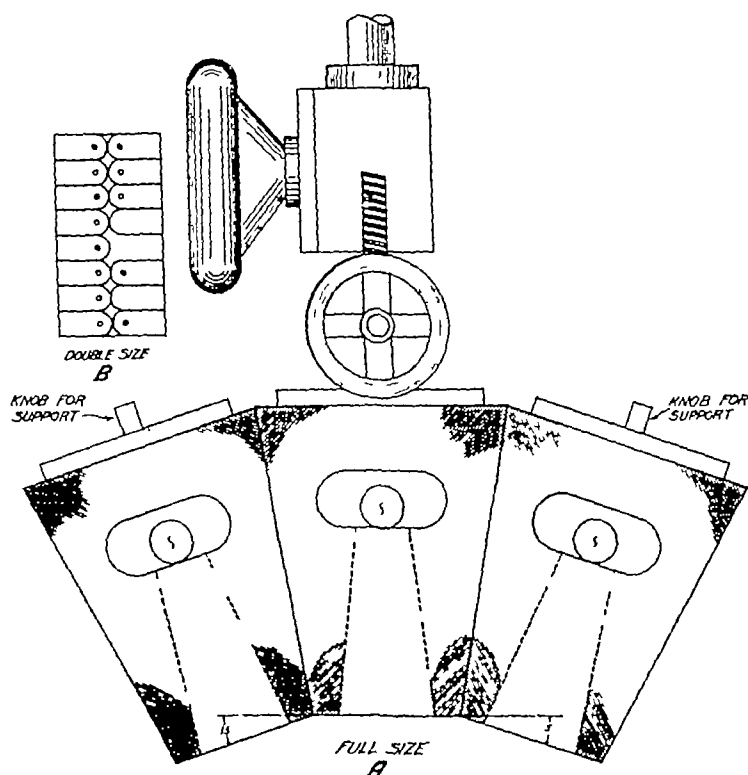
A Assembly drawing of the three-section pack showing relation of various parts
